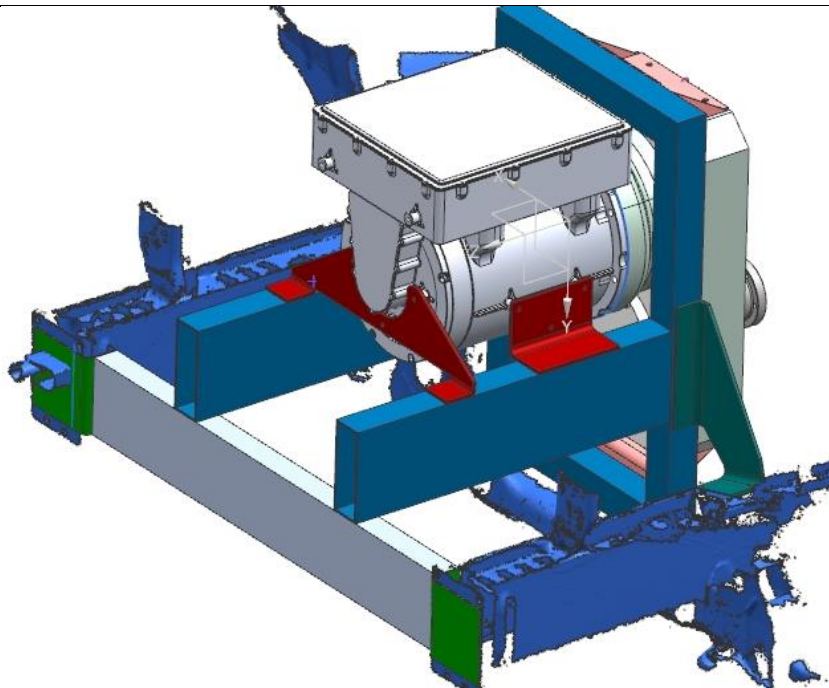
Front 3D view of the powertrain sub frame with the motor and gearbox assembled
